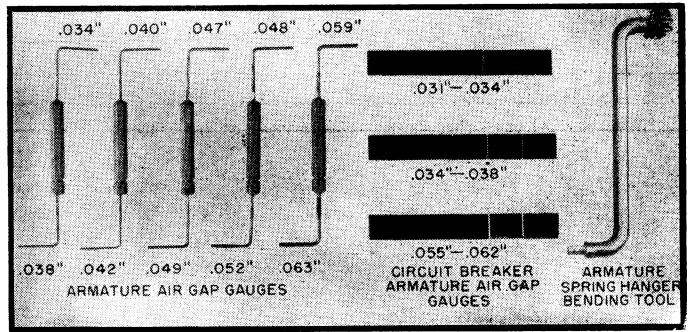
Tool kit for adjusting Auto-Lite regulators
